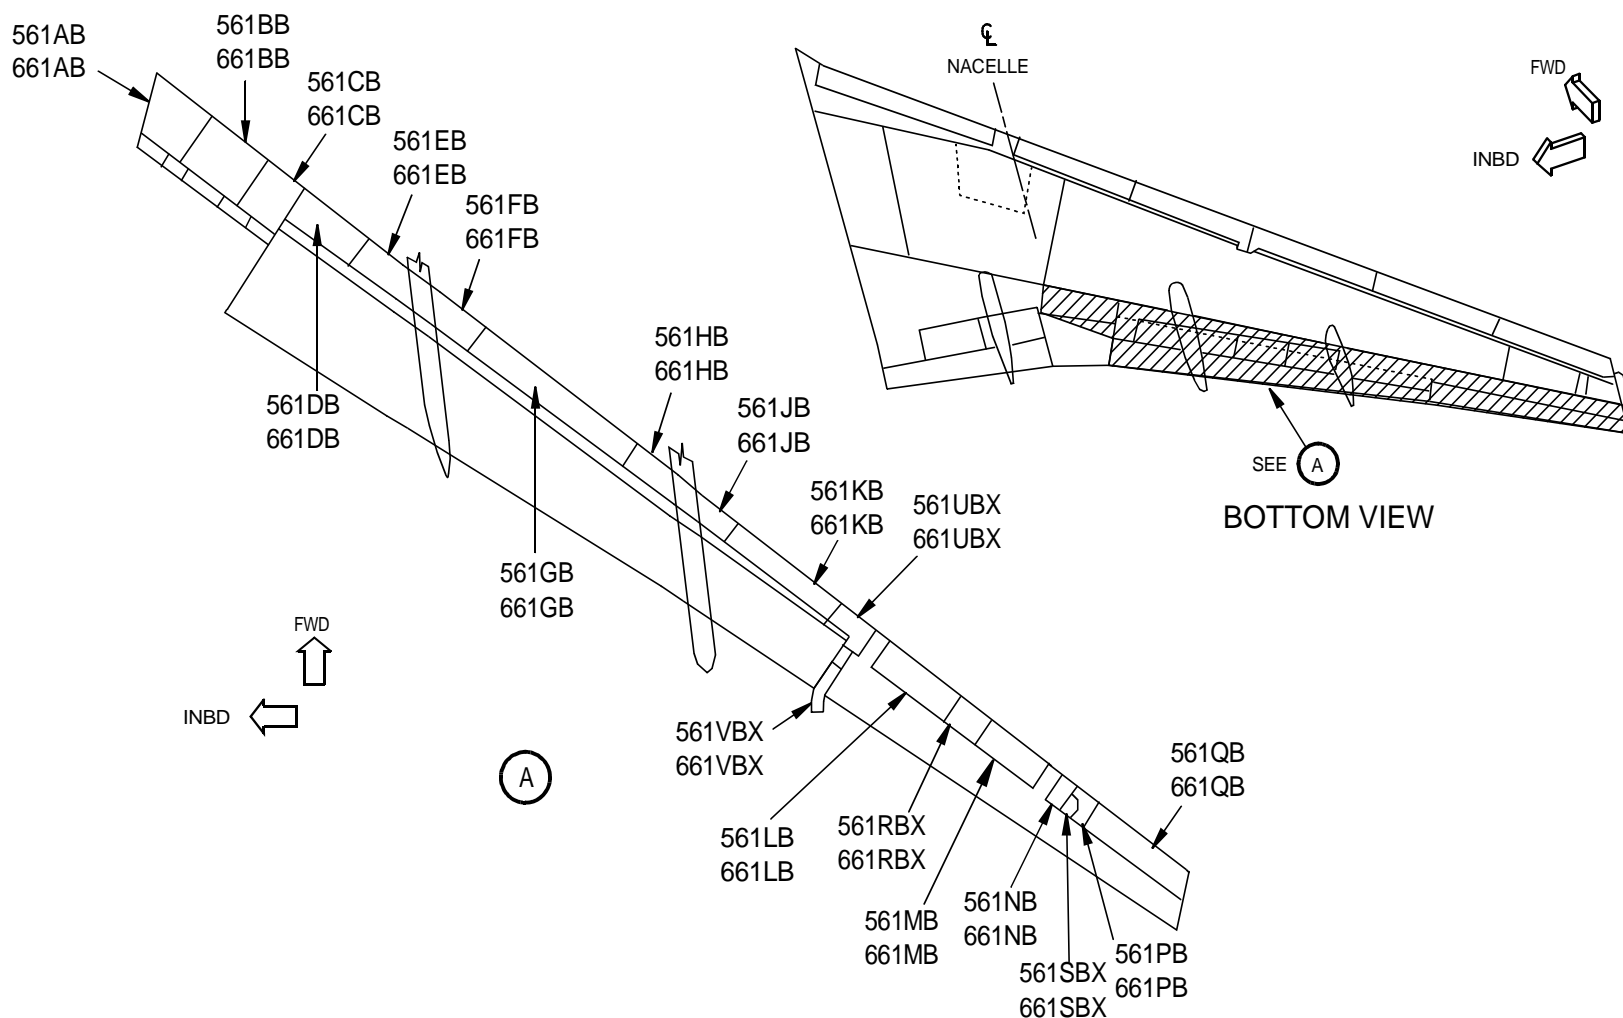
SUB-MAJOR ZONES 561/661 - OUTBOARD WING TRAILING EDGE (LEFT WING SHOWN, RIGHT WING TYPICAL)
